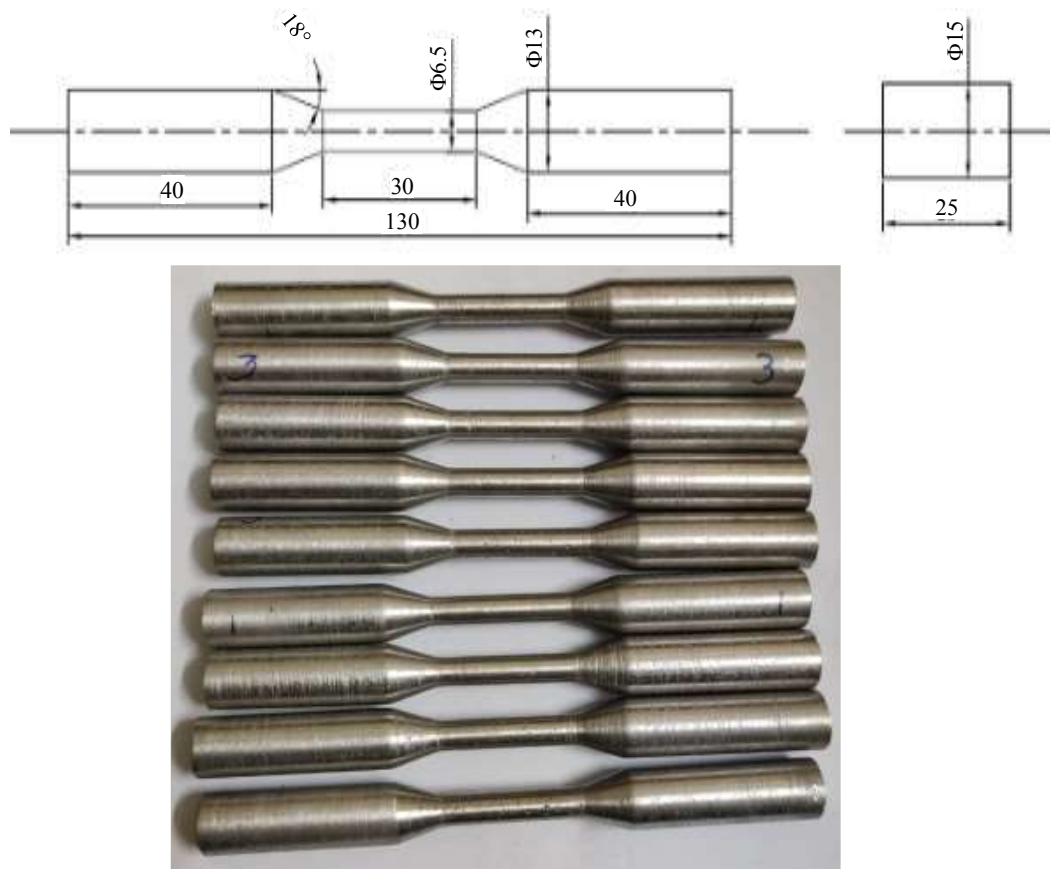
Drawing of tensile test specimen and Samples of tensile tests
